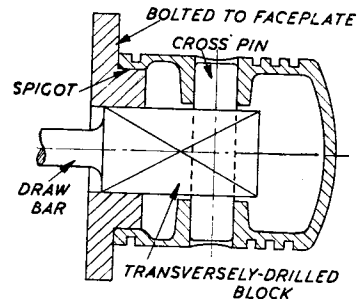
Faceplate chucking fixture for finishing pistons which are not machined all over the inside.
